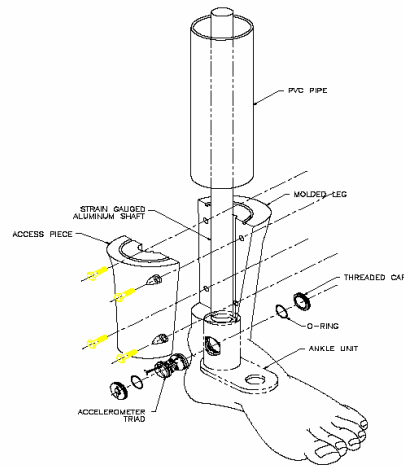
The DRDC Mechanical Leg (Courtesy DRDC, Canada)
